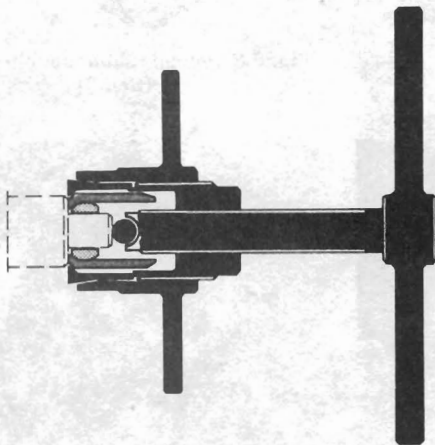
Typical tool for extracting spherical bearing and seat (Sec 3)
